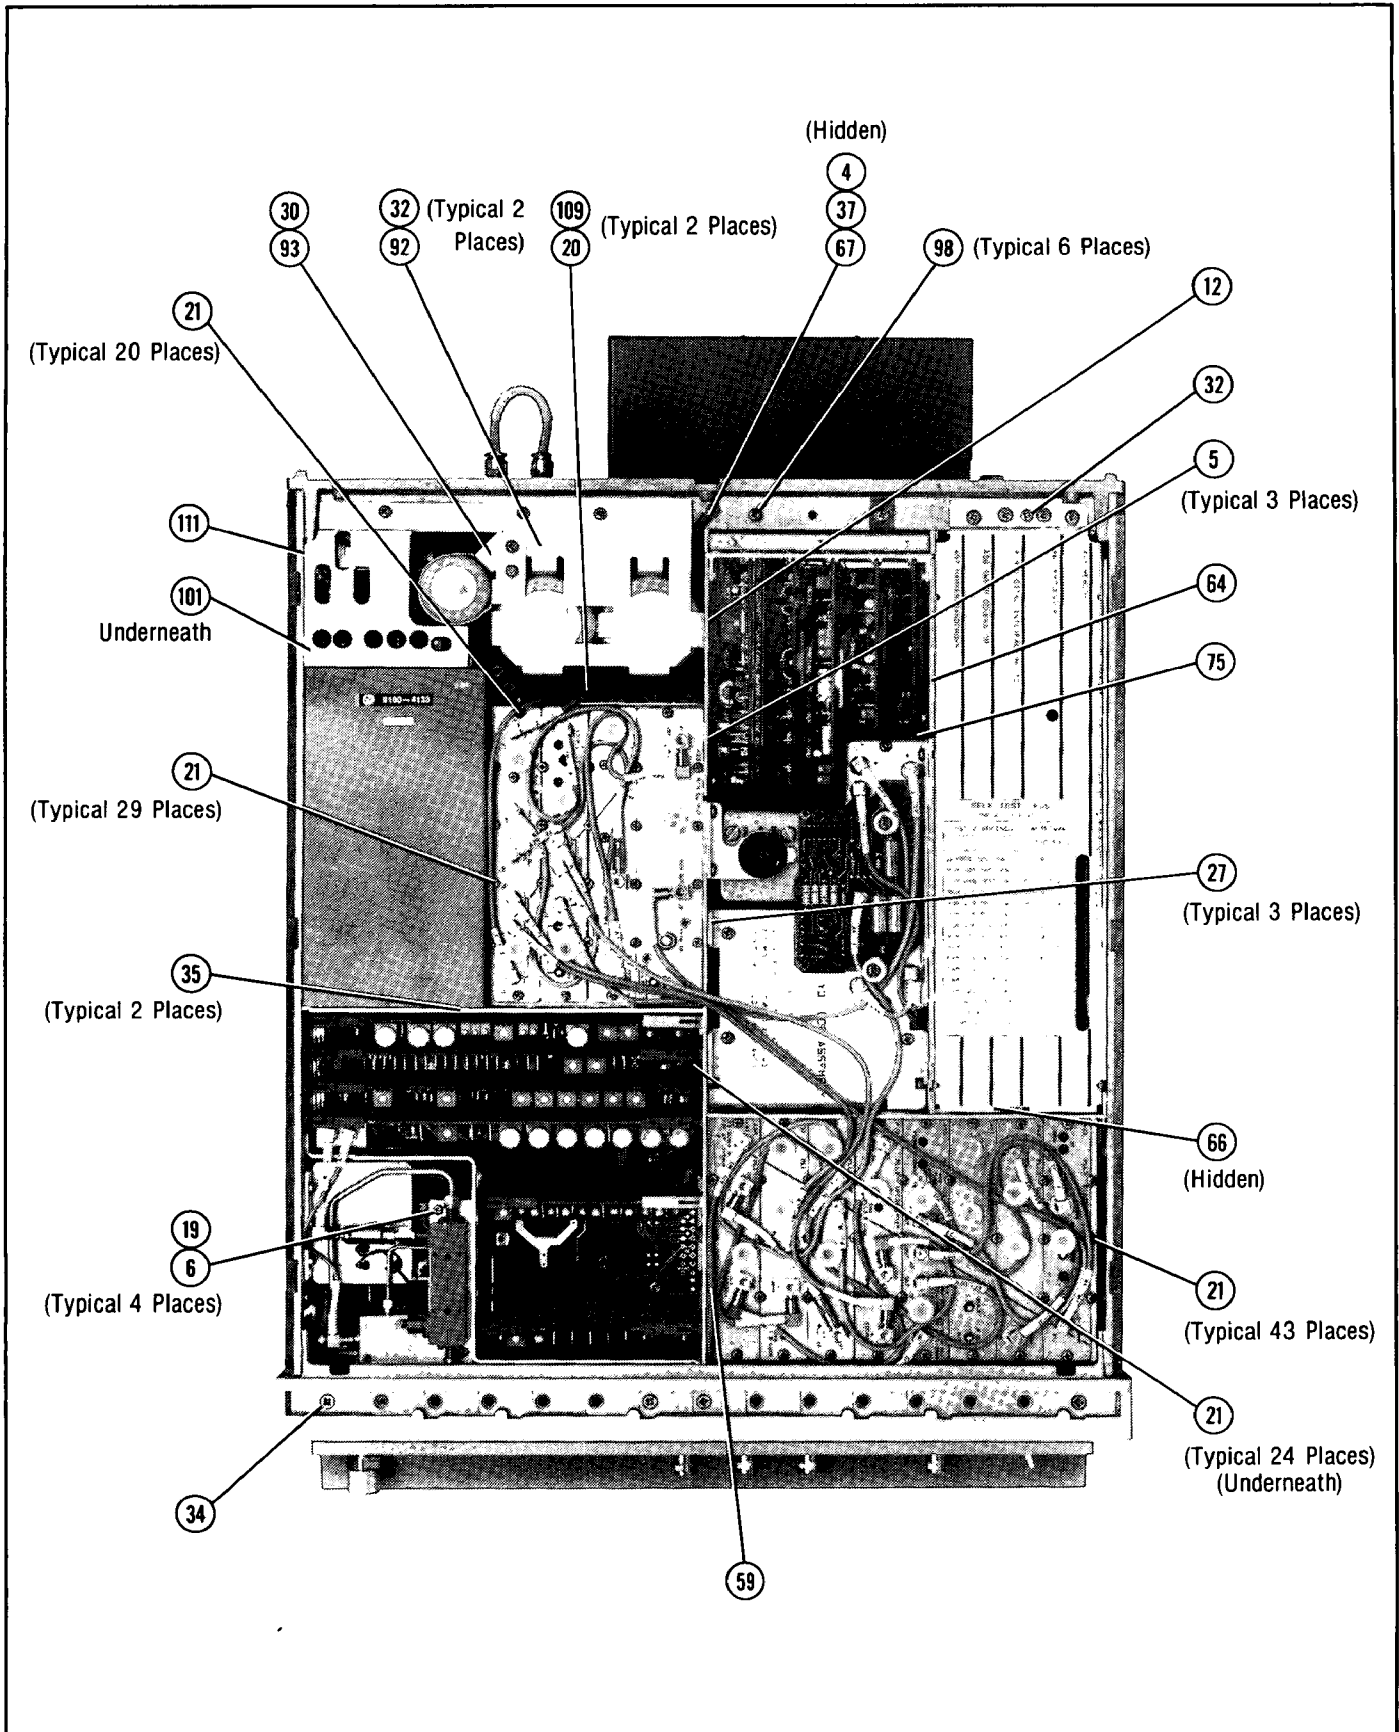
Miscellaneous Mechanical & Chassis Parts (6 of 9)
